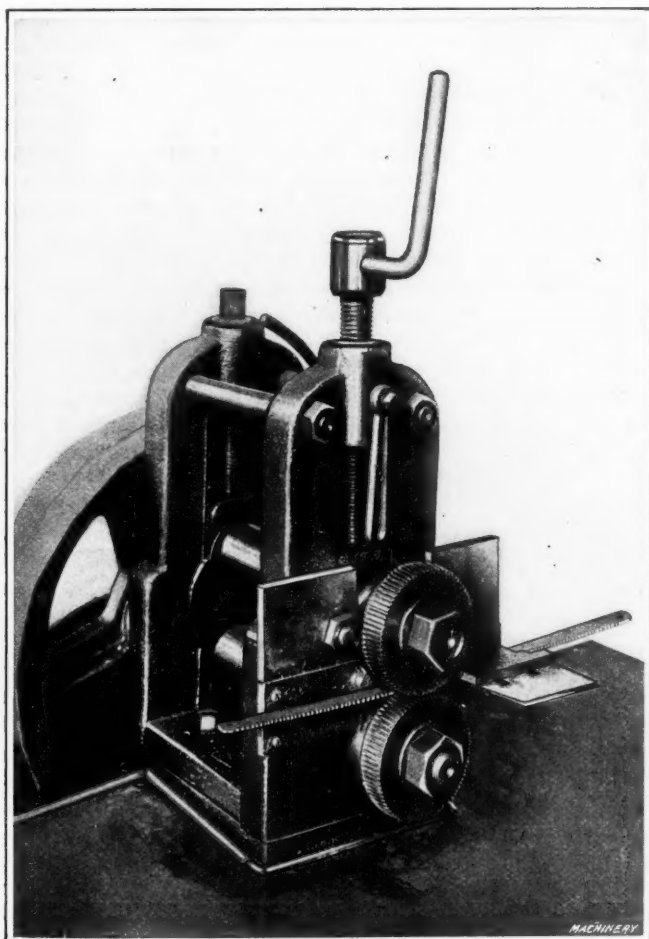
Close View of Setting Rolls on Machine used for setting Teeth of Hacksaw Blades
